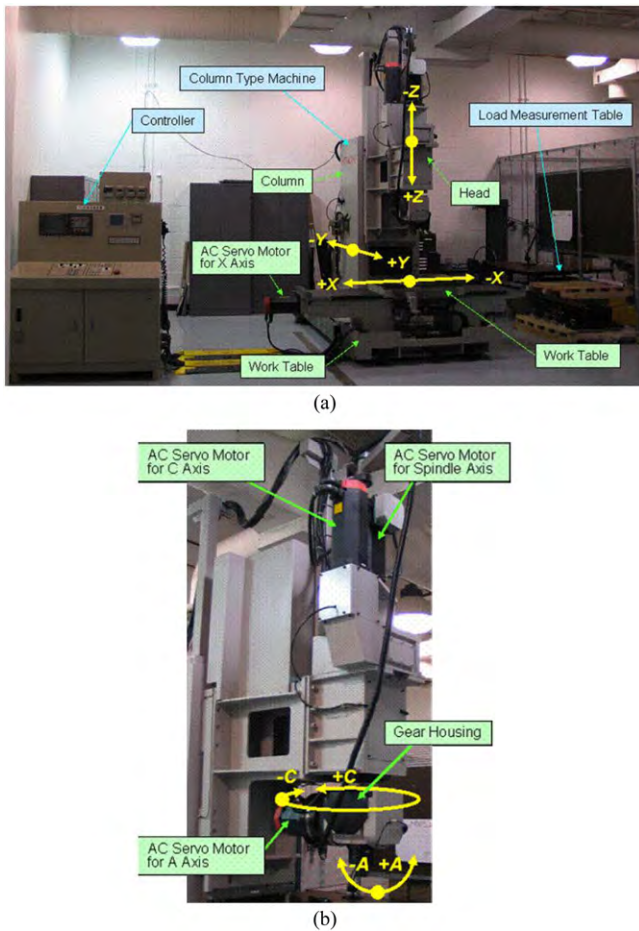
CNC controlled 3-D linear FSW system ‘HitSpin type GR3DC5T’: (a) 3-D FSW system ‘HitSpin’ and (b) the machine head.
